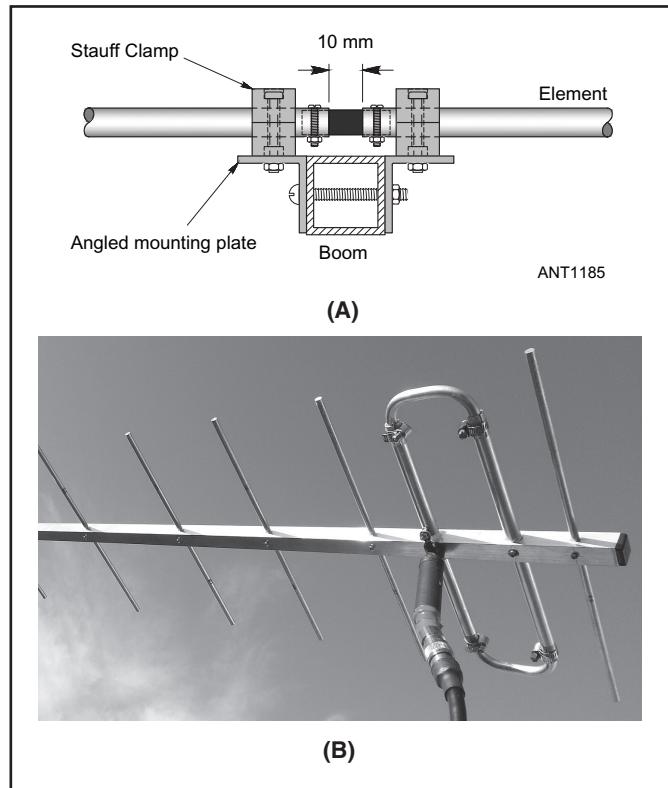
Figure A illustrates mounting the driven element feed point on a square boom using Stauff clamps and angled mounting plate. At B, the driven element loop is mounted using through-the-boom construction.
